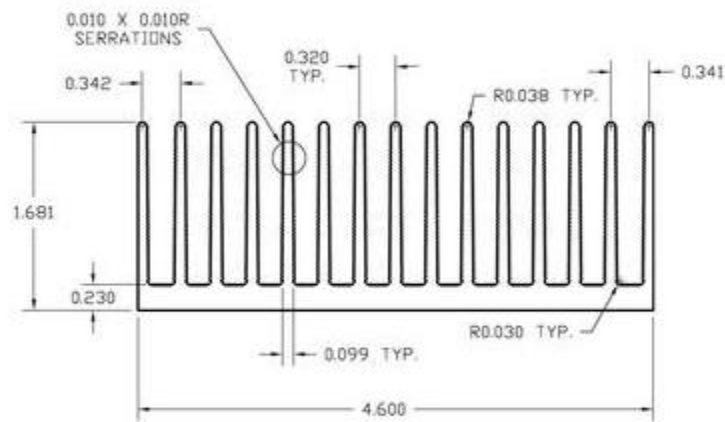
Schematic of 4.600: Wide Extruded Aluminum Heatsink. Figure taken from HeatsinkUSA [22]
